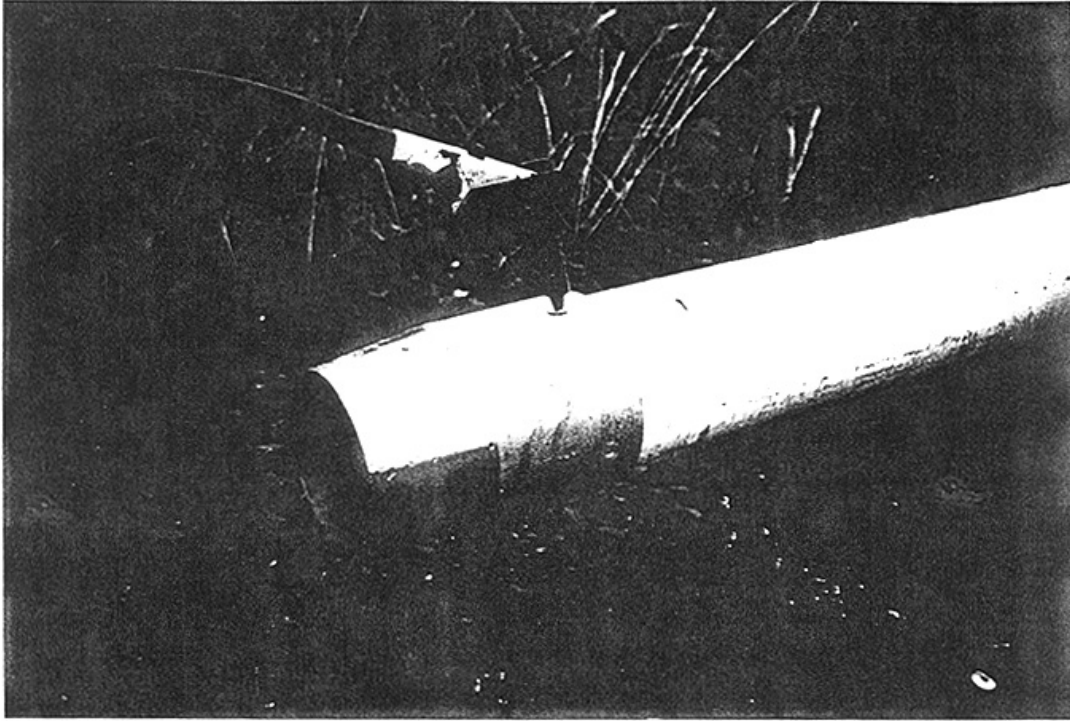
a. "Pop" riveting cutting nose onto core pipe- four inch trigger corer.
